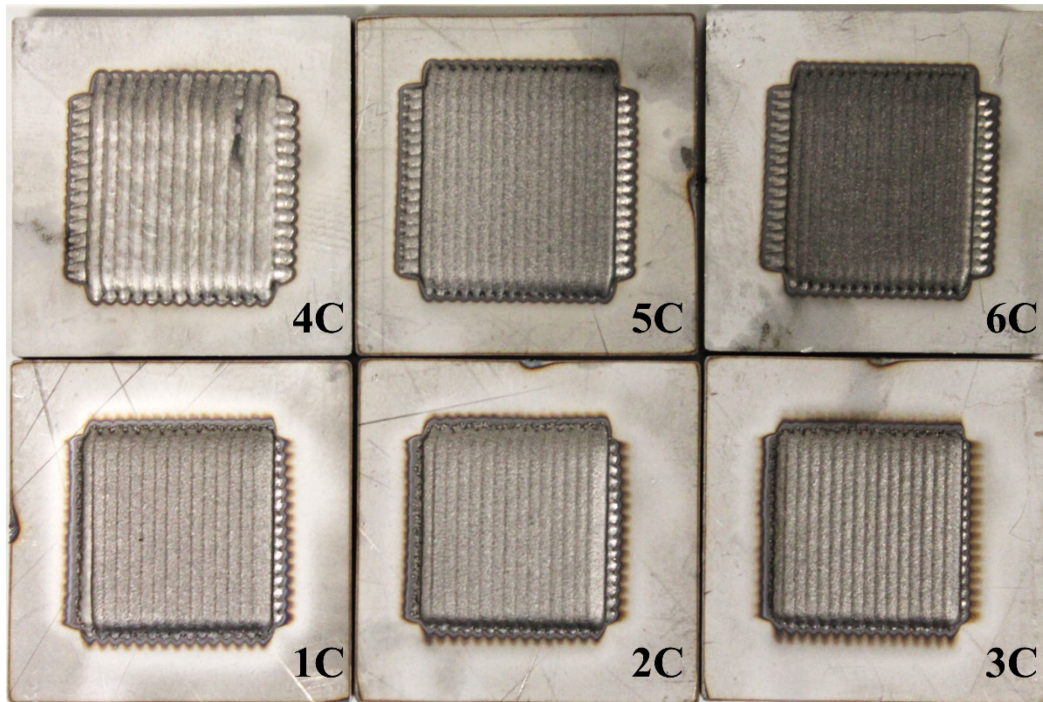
Top view macrograph showing the six fabricated MMC coatings.
